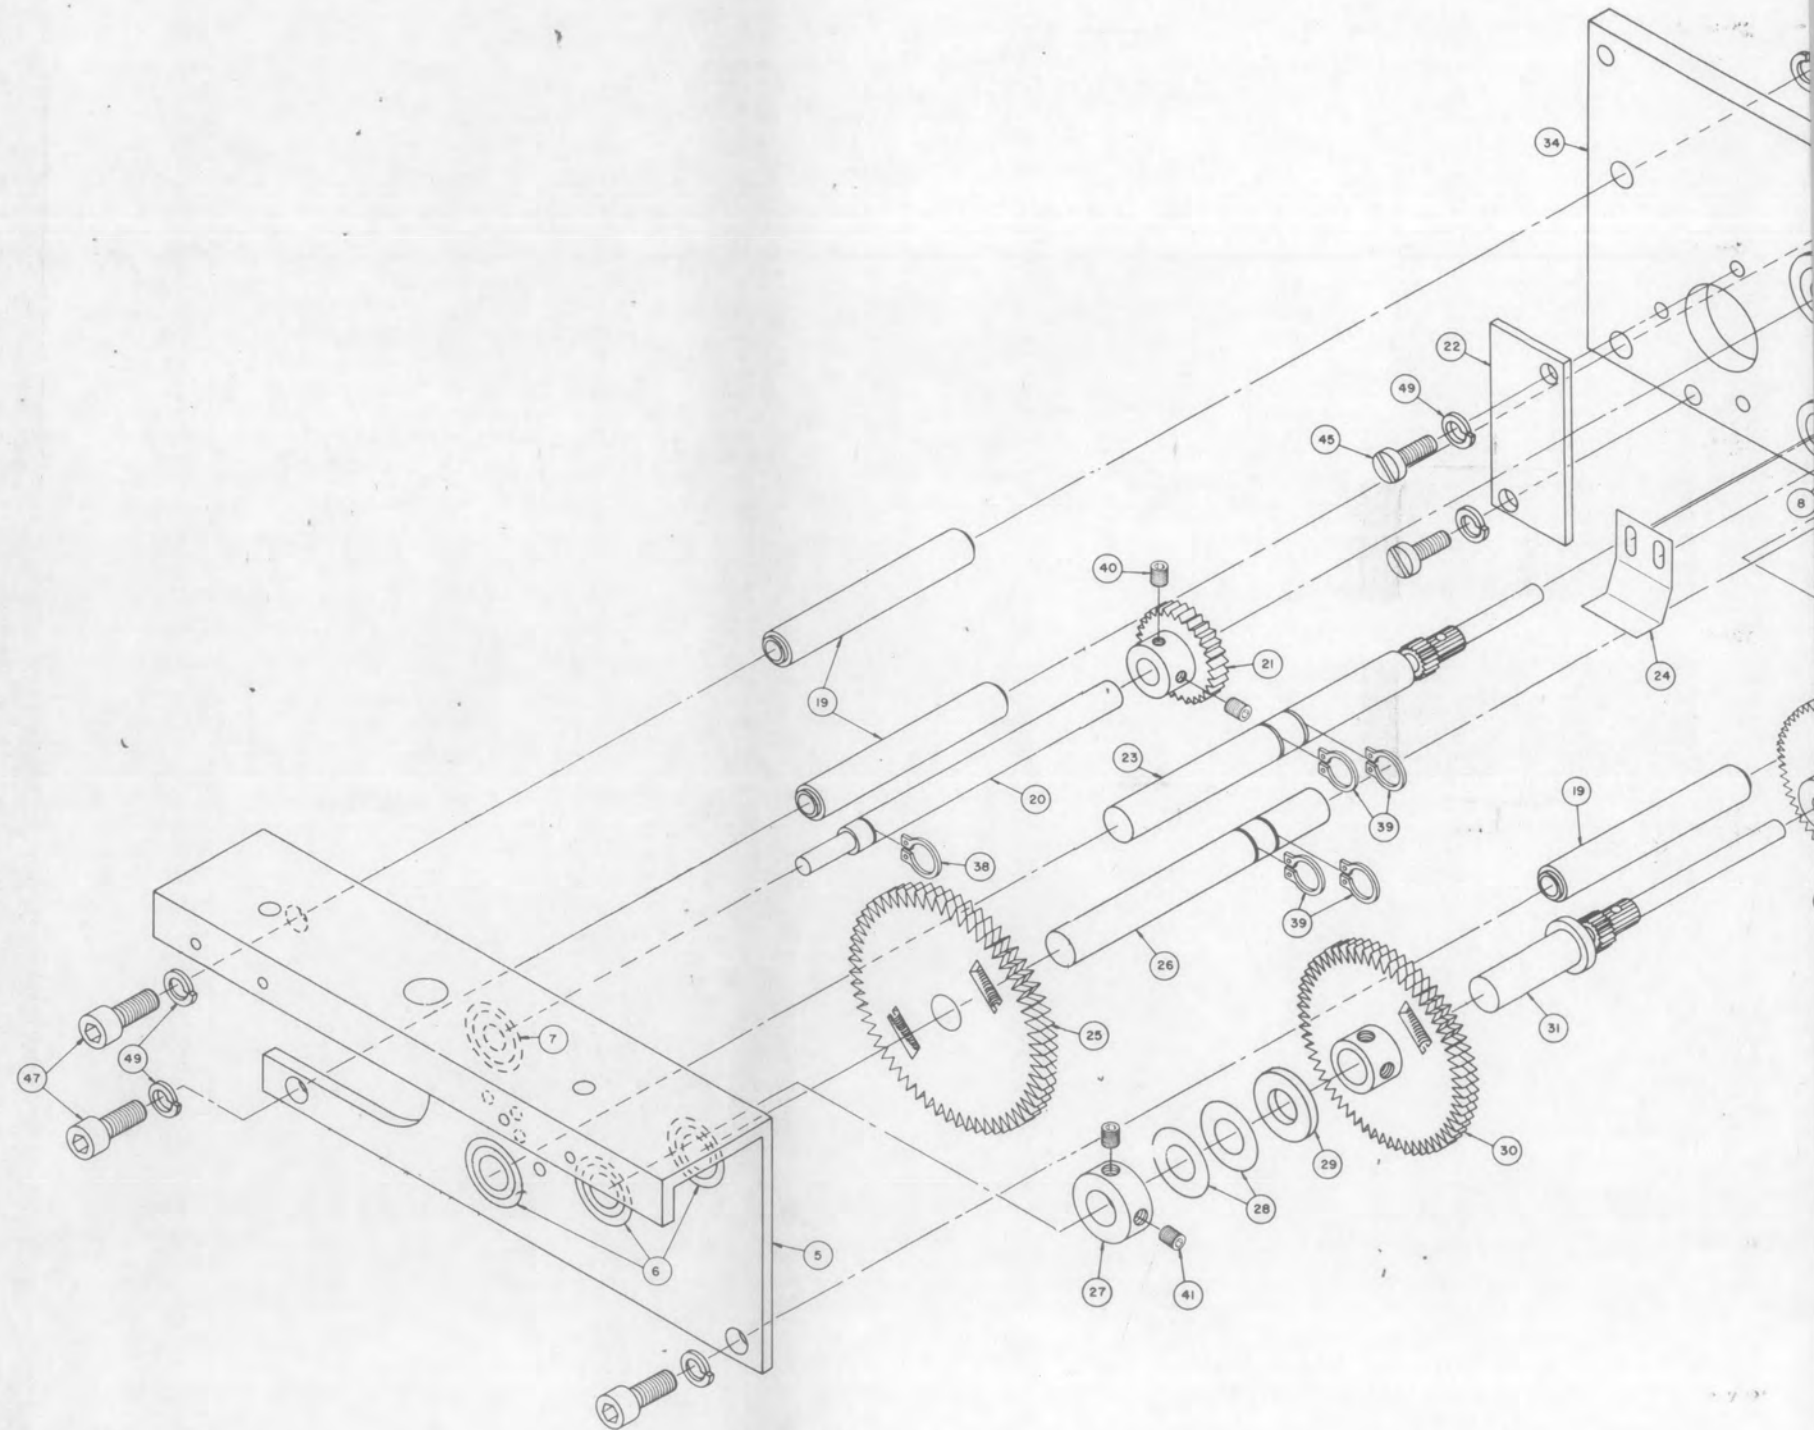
Type 8580 Tuning Drive (A7A2), Exploded View
